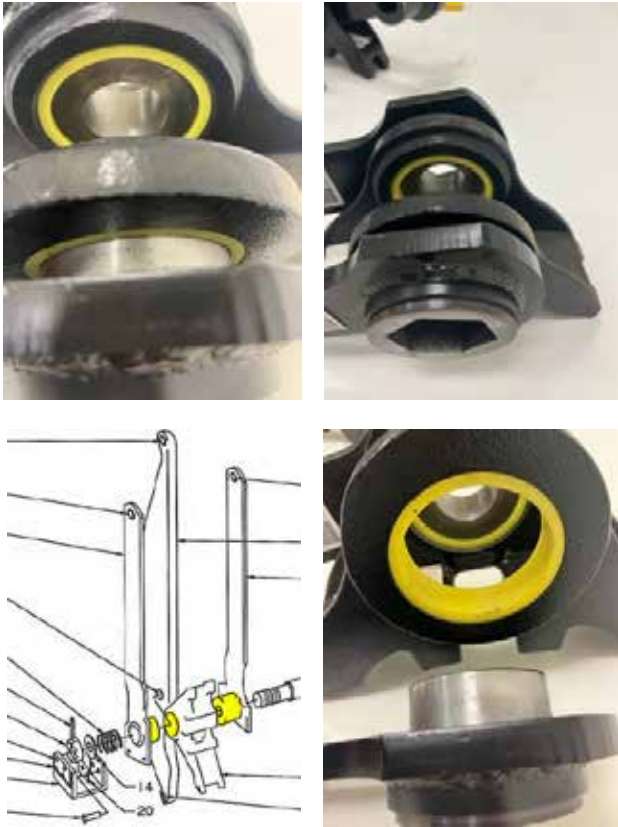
SD40, HTC and/or Flexicoil 3-axle truck assembly; Dead-Lever Brake Head location (steel bushing mates with thermoplastic ferrule)
